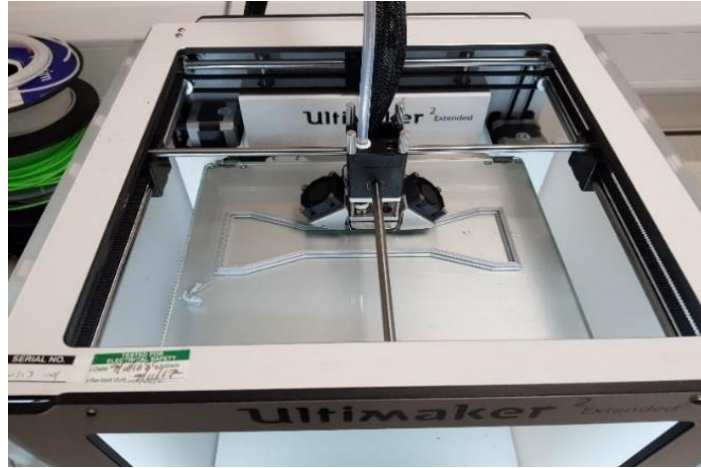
Designing and printing the dog-bone shape moulds using Ultimaker 2+ plus 3d for the direct tension test.
